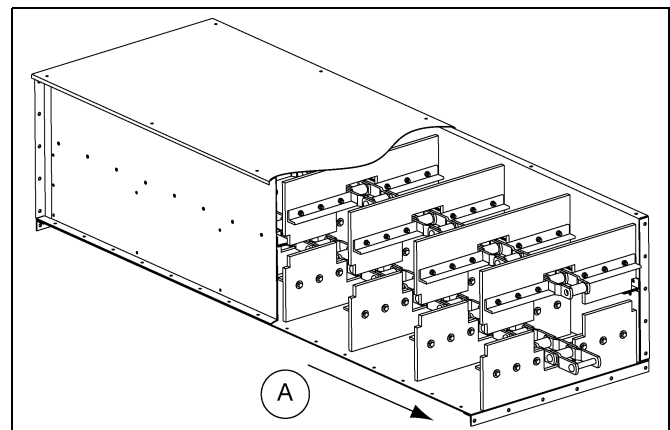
J 6" Pitch Chain Assembly (36 x 27)
